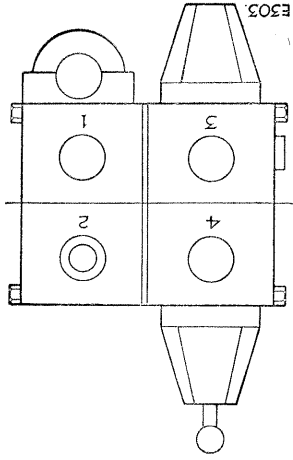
Rear view of control valve, showing sequence of pipe fitting
